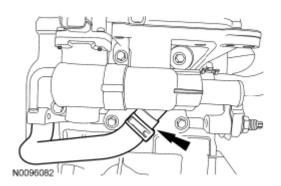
Locating Coolant Outlet Bypass Hose Courtesy of FORD MOTOR CO.
